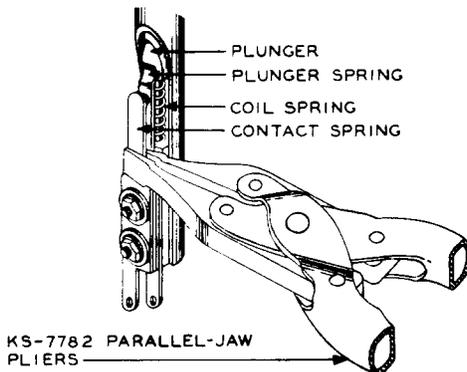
Method of Adjusting for Clearance Between Plunger Spring and Plunger, Plunger Travel, Contact Separation, Contact Pressure, Contact Follow, and Plunger Operate Pressure
